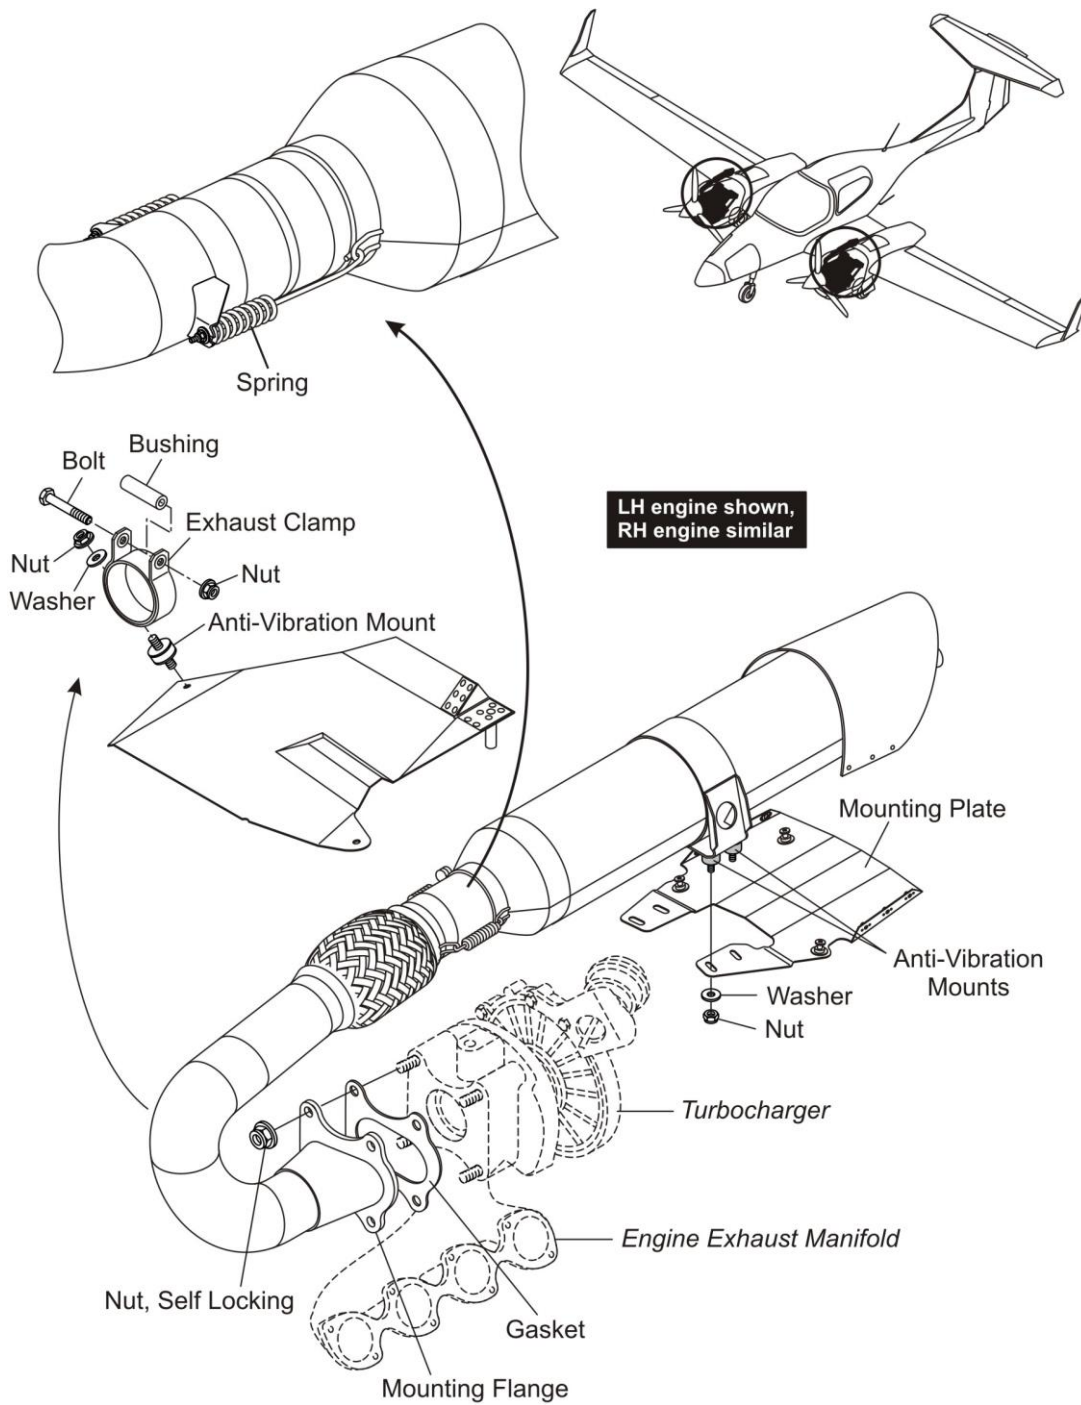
On Top Exhaust System Installation (OÄM 42-173/z or later), Exhaust Tube Part Number: D65-7806-10-00\_06, Bushing installed
